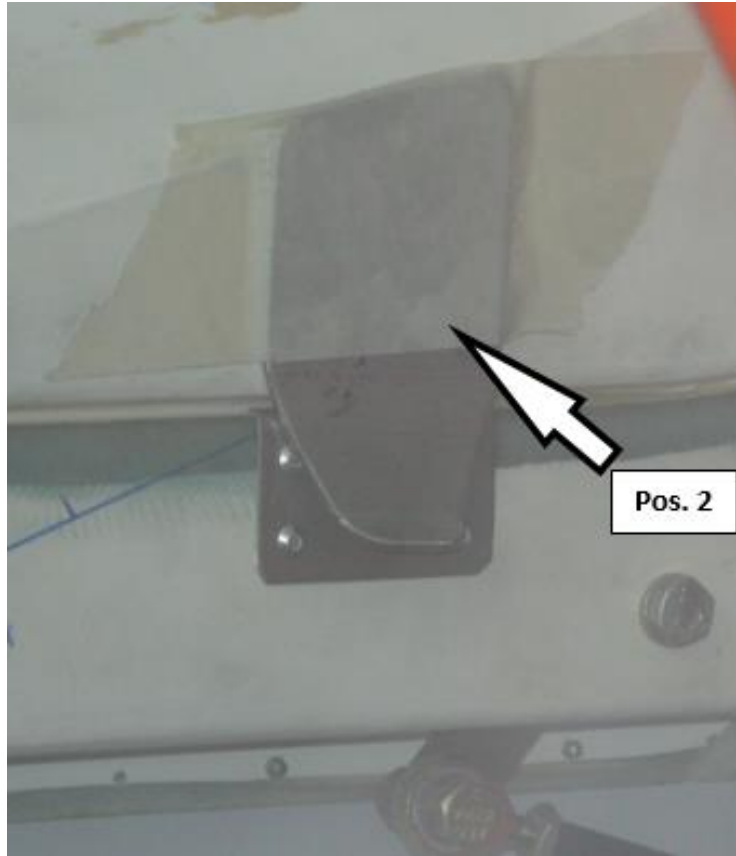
Positioning of the guiding metal plate on the movable frame (view of the left side of the cockpit)
